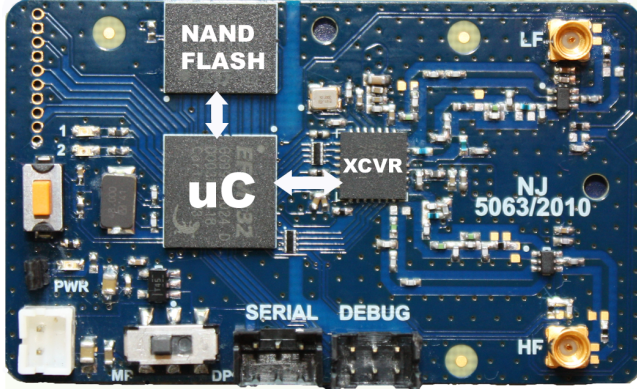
Physical appearance of the developed board. The board size is 35 mm x 58 mm
